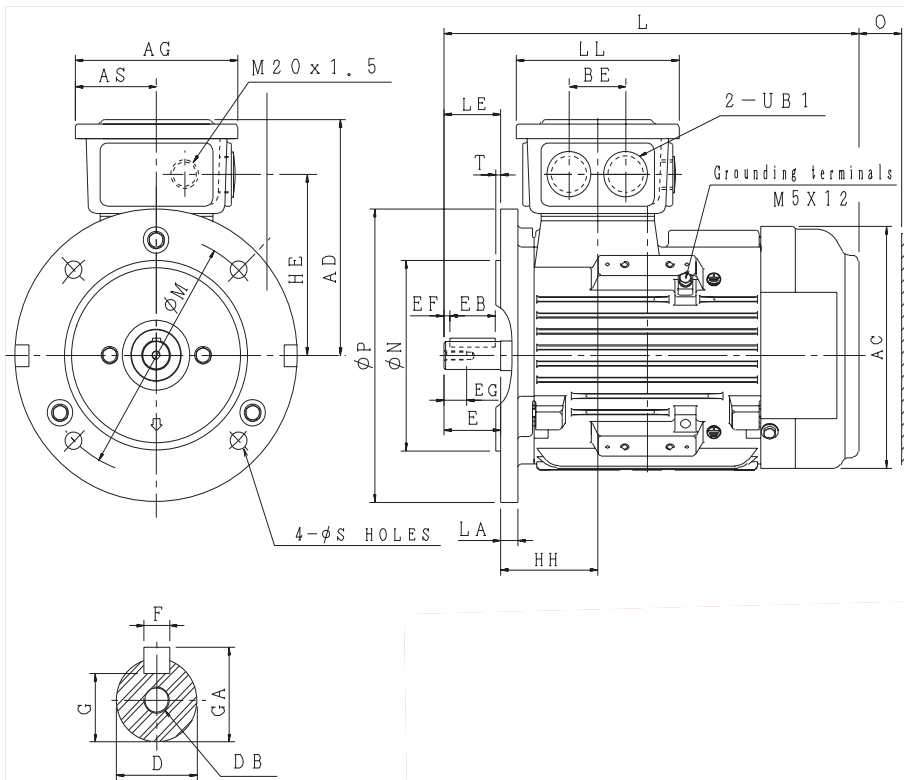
Outline drawing of cast iron design, feet version, mounting B5; frame size 80M - 90L
